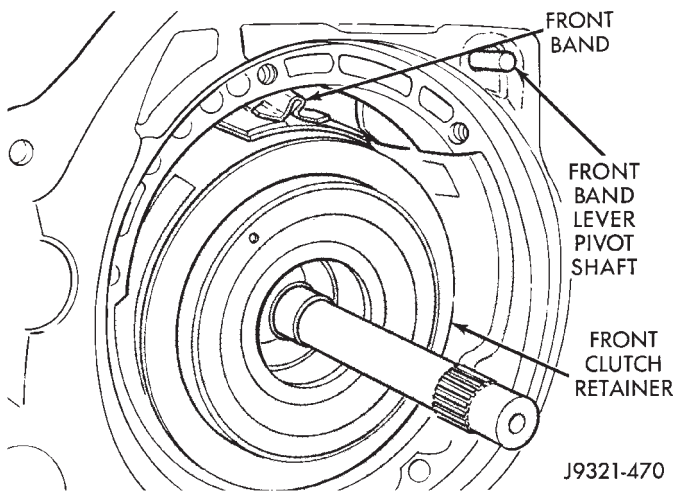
Installing Front/Rear Clutch Assemblies
